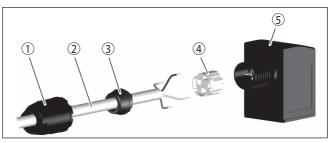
Connection, valve plug ISO 4400 with IDC crimping technology
